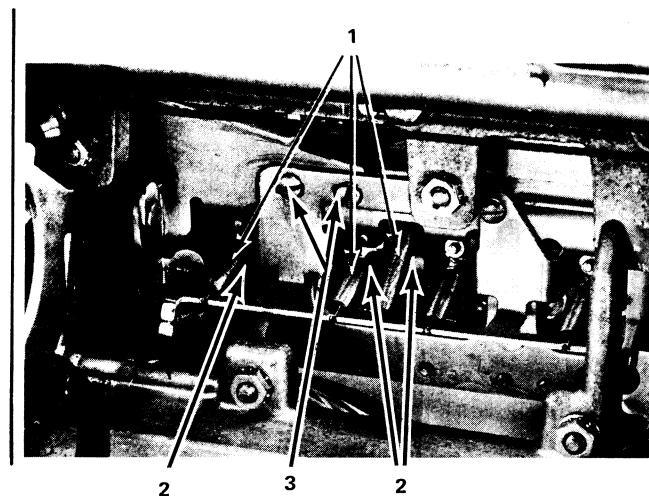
Rotate Selection Differential Removal (Rear of Printer, Motor Removed)
